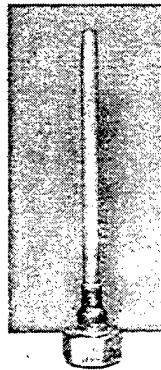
Four-inch length nozzle assembly of 0.181" diameter.
